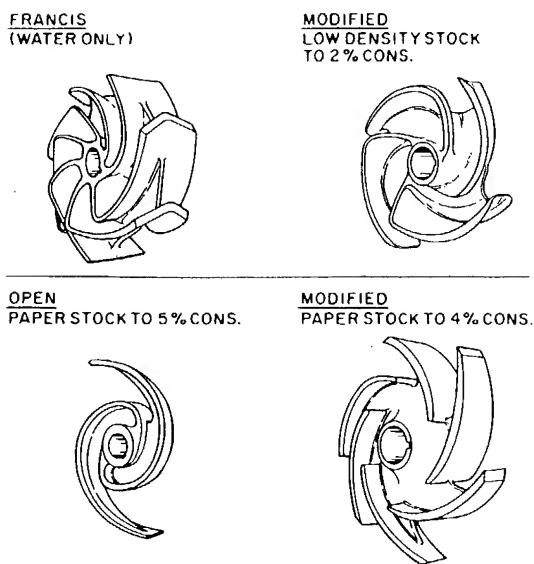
Centrifugal pump impellers for water and pulp stocks (Black Clawson Co.).
